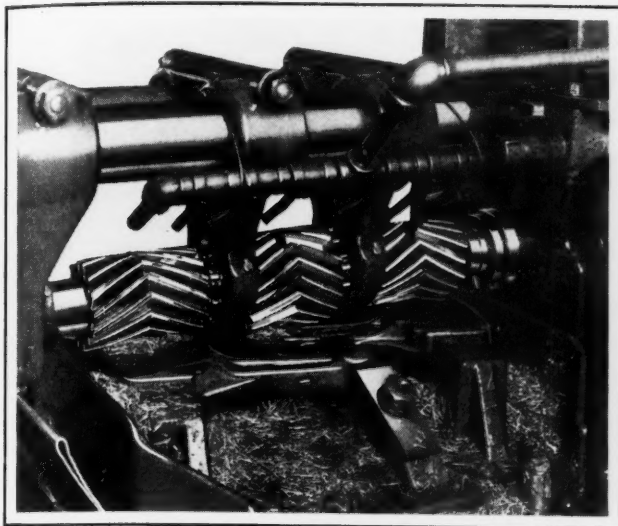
Slab-milling Faces of Crankpin and Piston-pin Bosses
